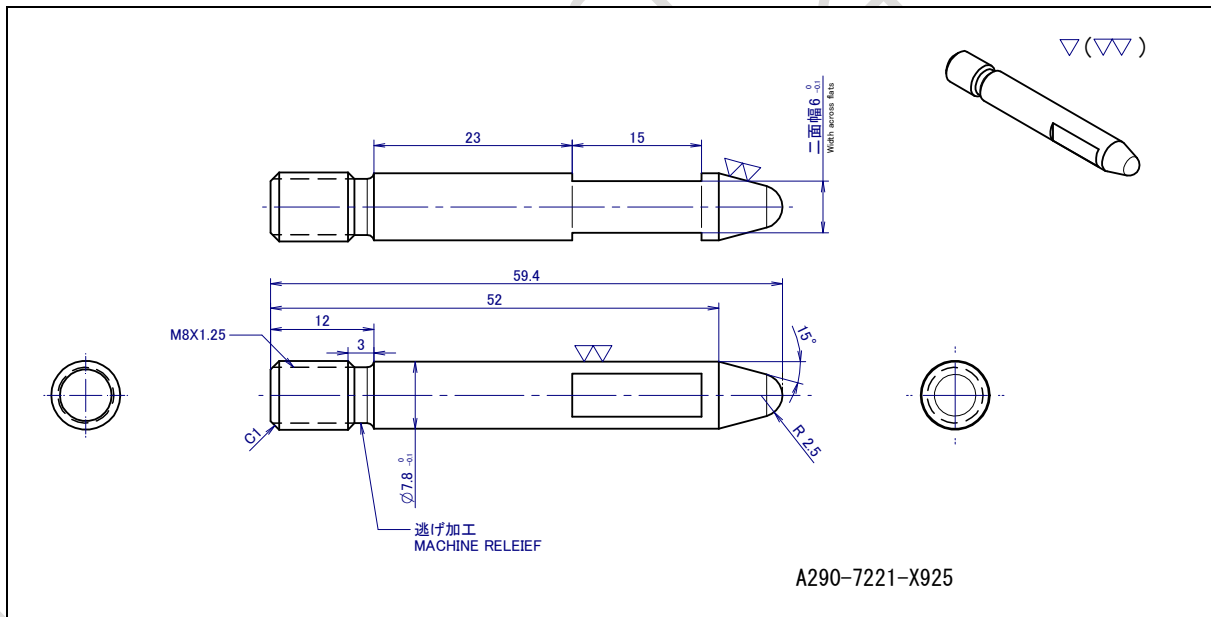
(b) Guide pin for replacing J3-axis reducer (M8)
